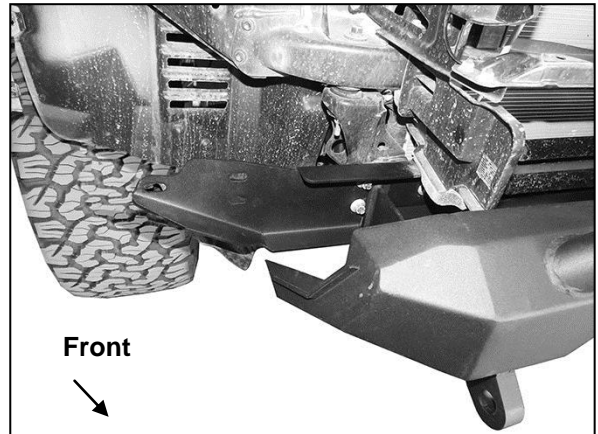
Remove the (3) factory hex nuts attaching the passenger/right Hiline bumper bracket to the frame (arrow)
